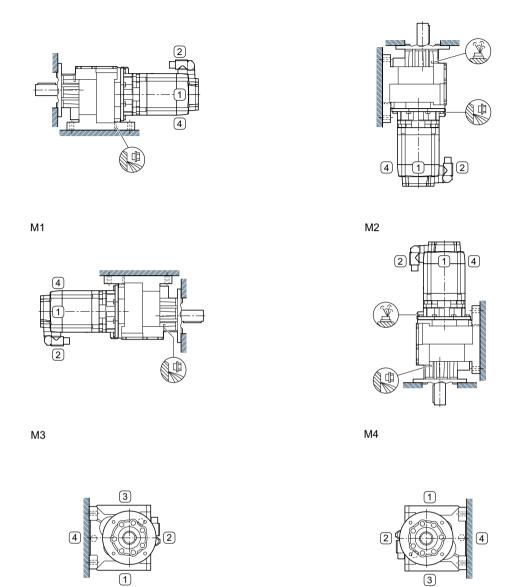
Mounting positions for servo helical geared motors ZB and DB, foot-mounted and flange-mounted designs, frame sizes 29, 2 stage and 3 stage
